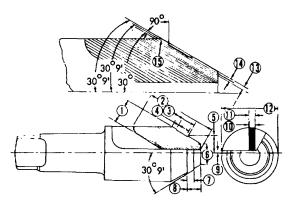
ST-397-3 injector seat cutter dimensions
